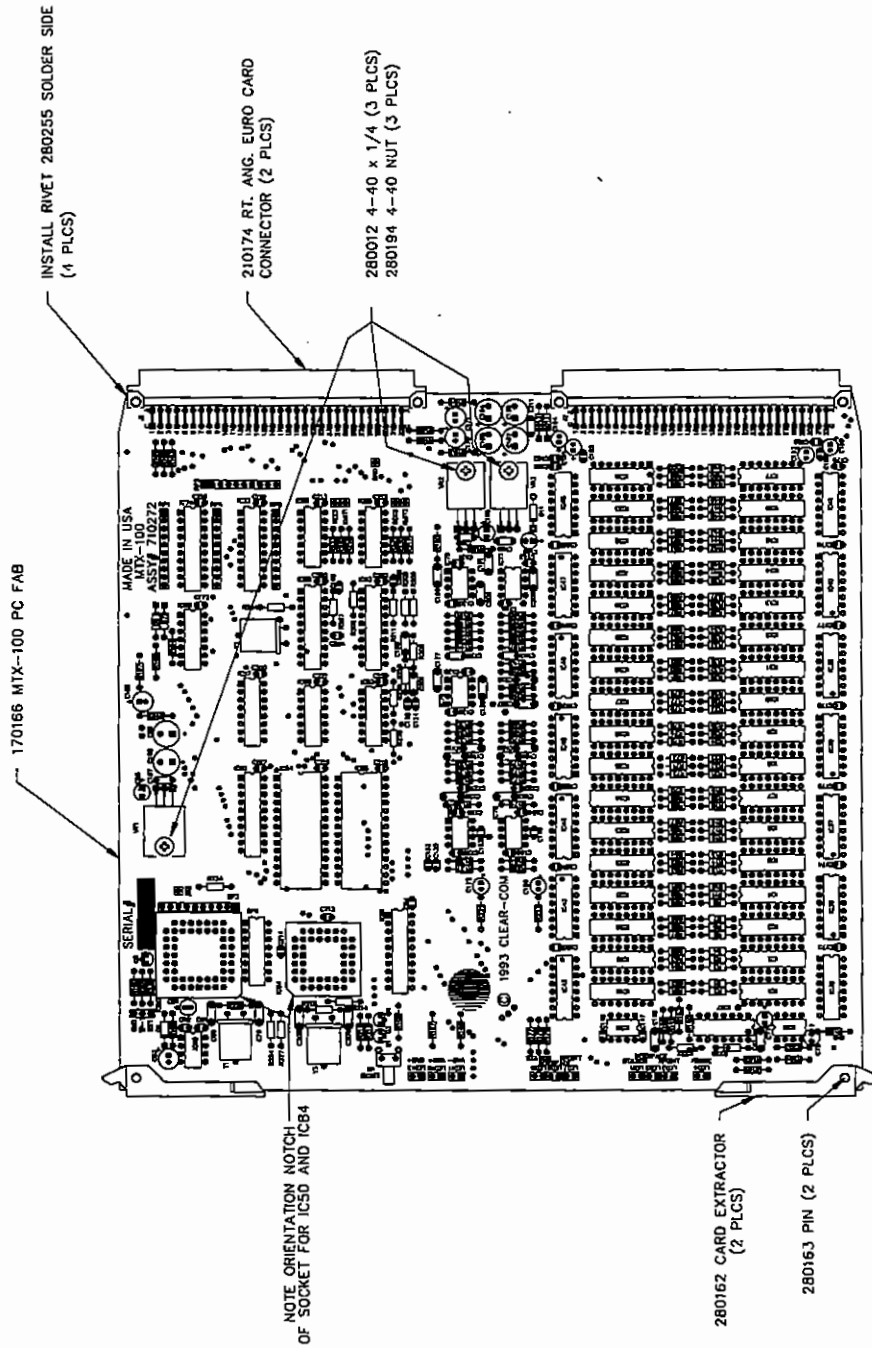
Assembly Drawing - MTX-100 PCB, Rev. D
